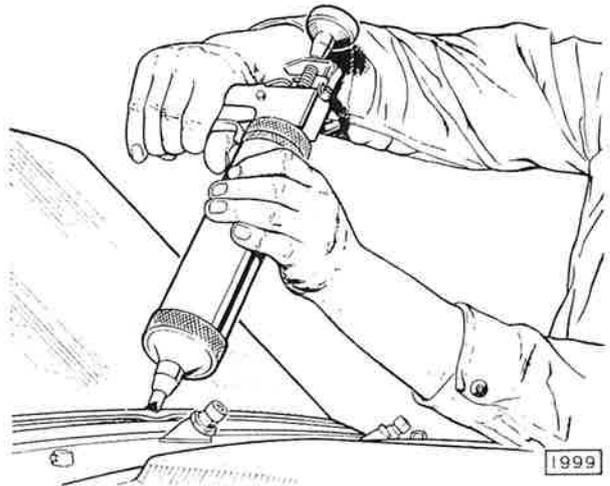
Using a gun to inject sealing compound between the surround and the glass
